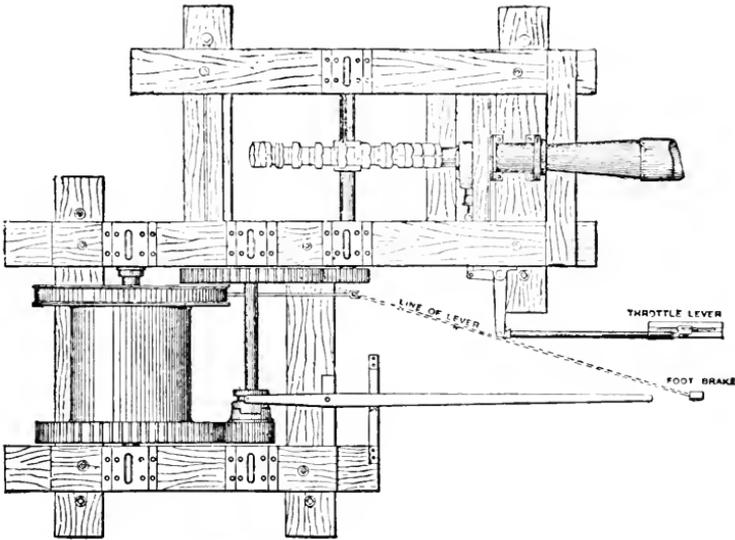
PLAN OF PELTON WHEEL AND HOISTING GEAR.
